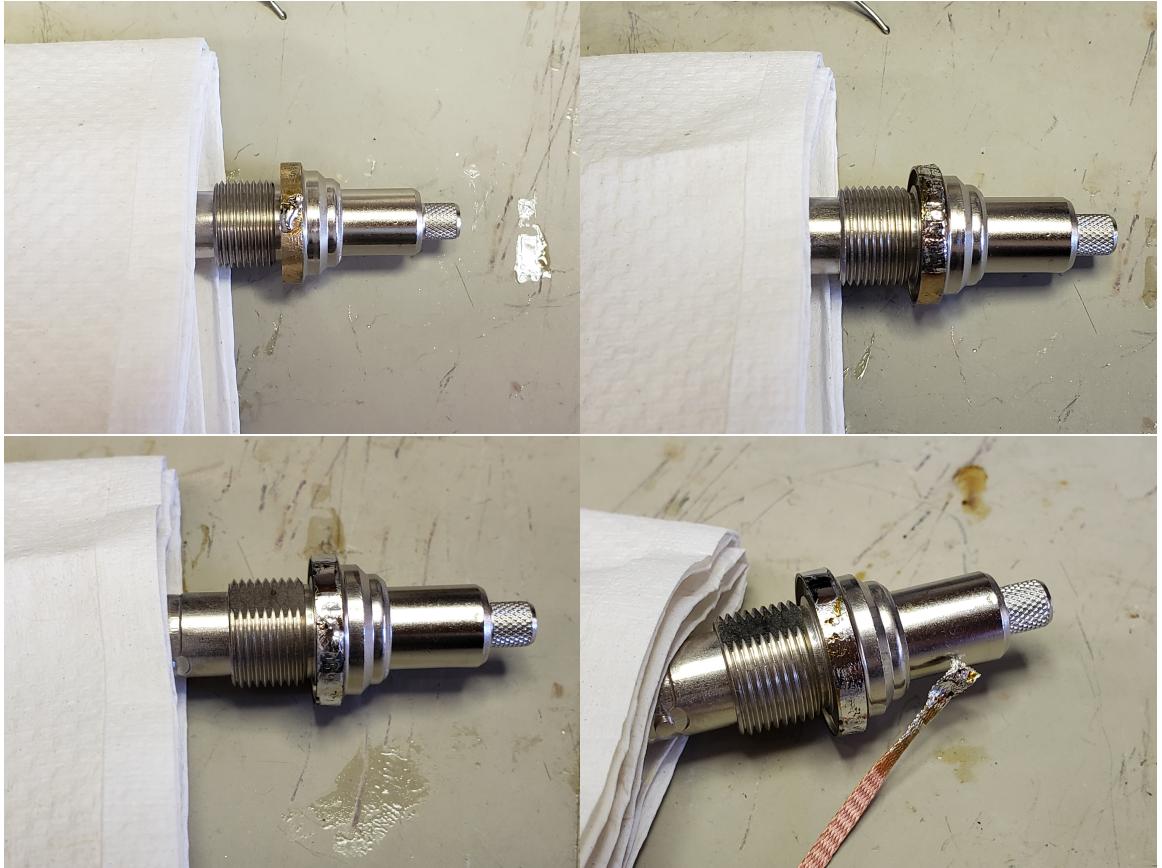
Top left: a small blob of solder applied to edge of SHV jack body. Top right: spreading the solder around the edge. Bottom left: extra solder after covering entire edge. Bottom right: SHV jack body after excess solder wicked away.
